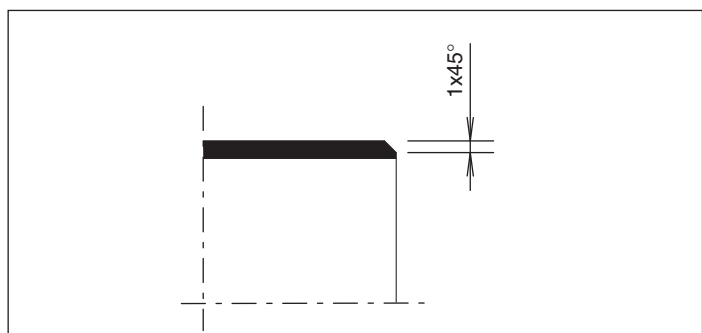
Welding edge preparation for Jansen-Economy 50/60
